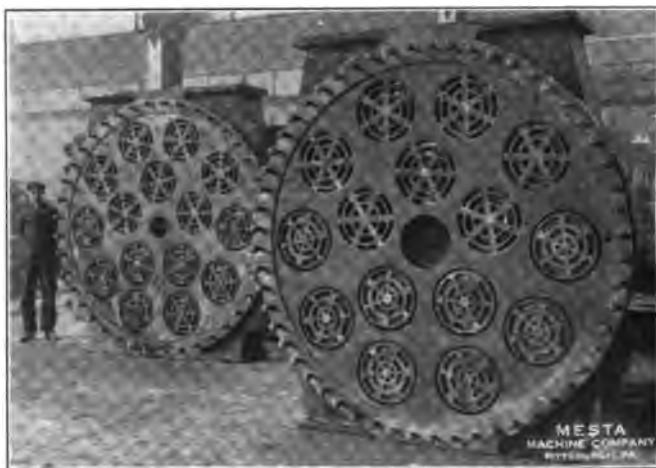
Air heads equipped with "Mesta" automatic plate valves (Iverson patent).
